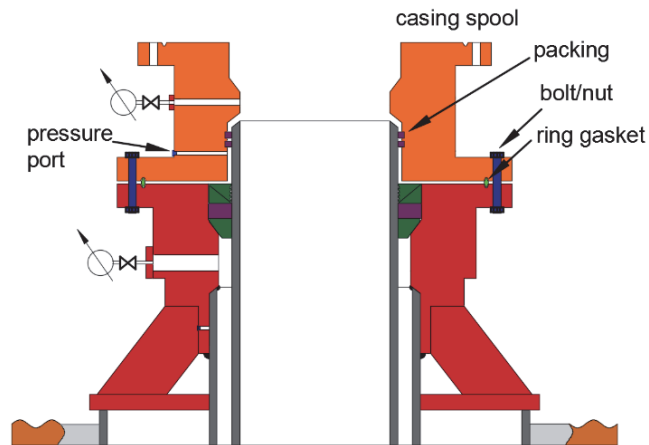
INSTALLATION OF THE CASING SPOOL TO THE CASING HEAD
